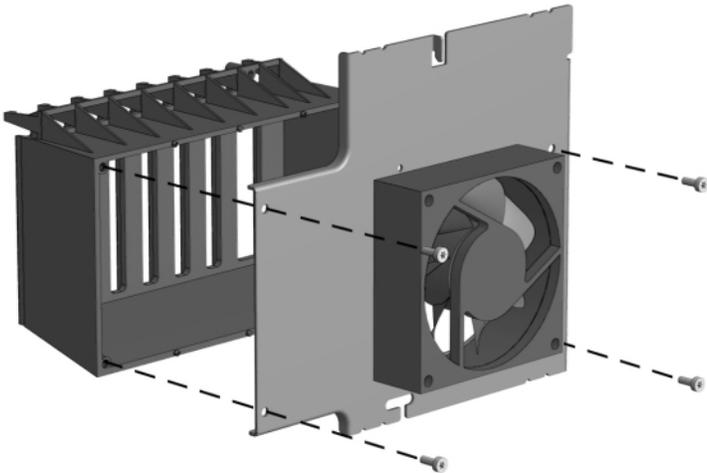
Removing the four screws securing the card guide to the card guide bracket
